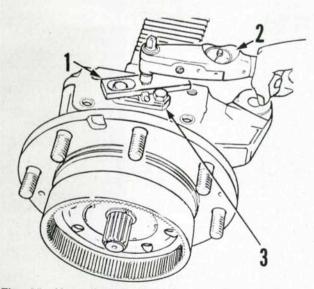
Use adapter (1) and a torque wrench (2) to measure torque required to swivel steering knuckle. Refer to text for adjustment of kingpin bearing preload.
